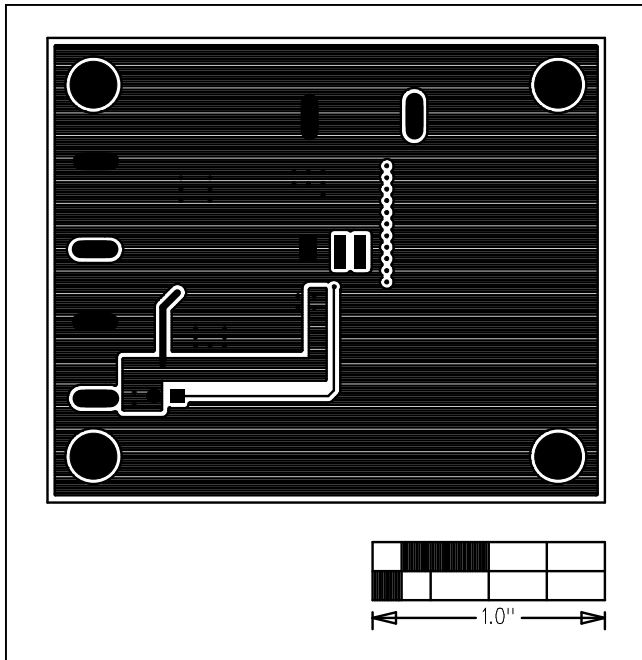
MAXM17514 EV Kit PCB Layout—PGND Layer 2
